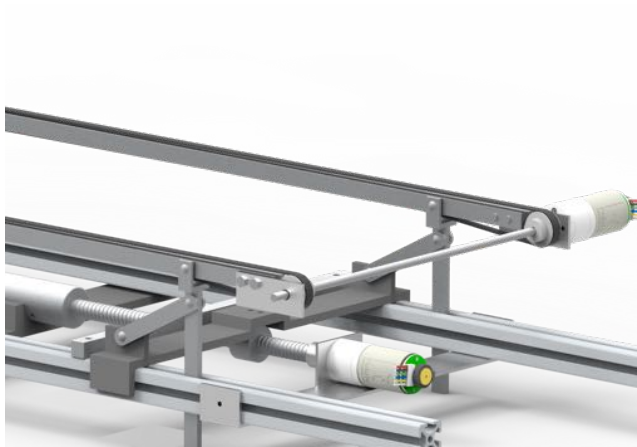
Assembly of side belts. The actuator is connected to the belts with a shaft fitted with pulleys
